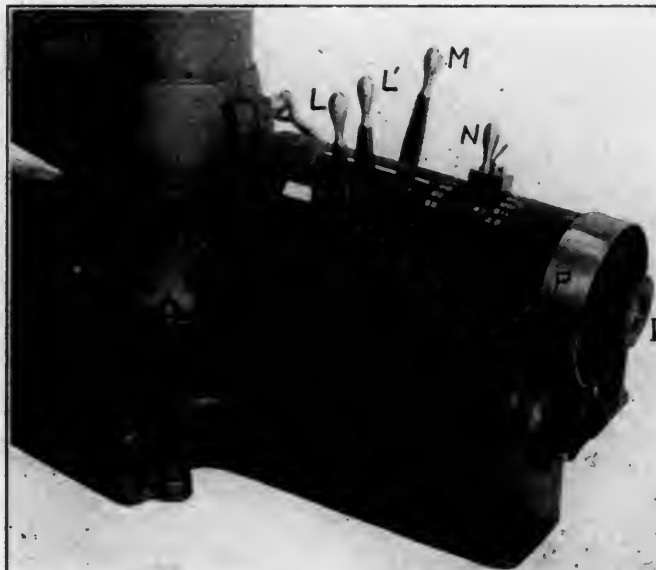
REAR VIEW OF THE SPEED BOX, SHOWING CASING FOR INTERMEDIATE GEARS.
